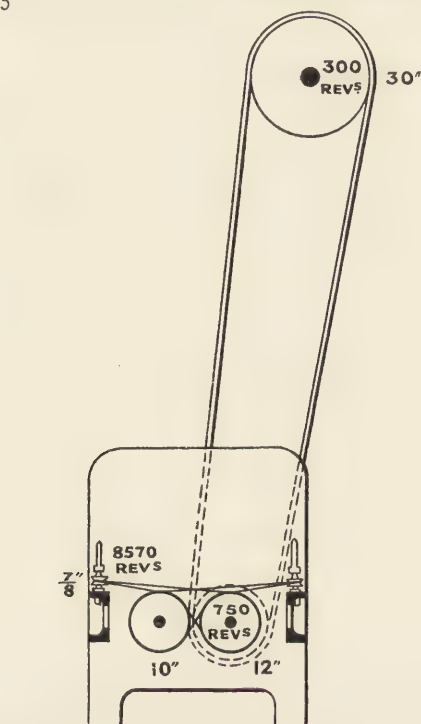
SECTION SHOWING THE DRIVING OF SPINDLES IN THE RING THROSTLE.
